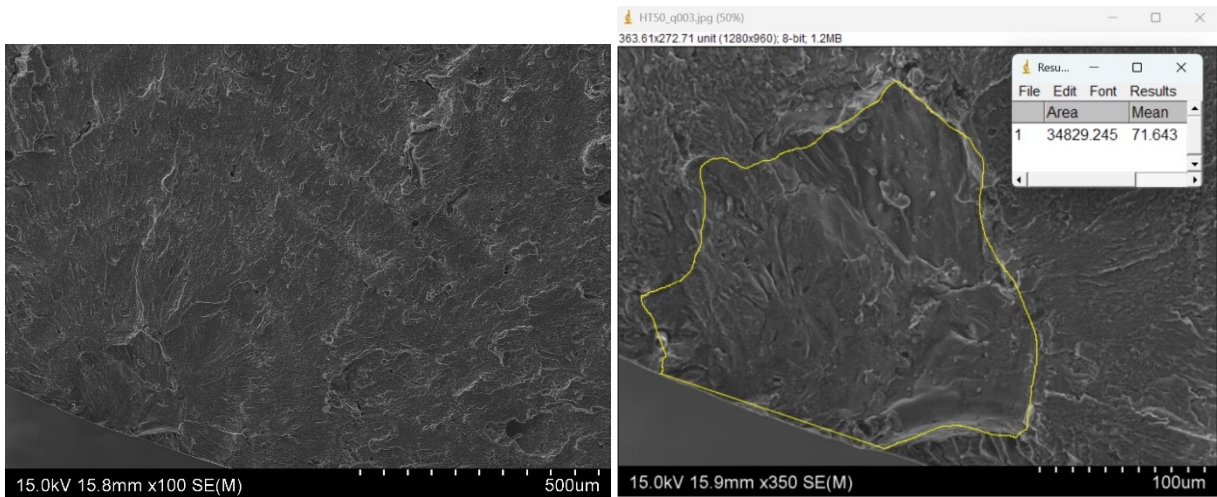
Fracture surface of sample CD_LBD-HT-2 a) x100, b) x200.
